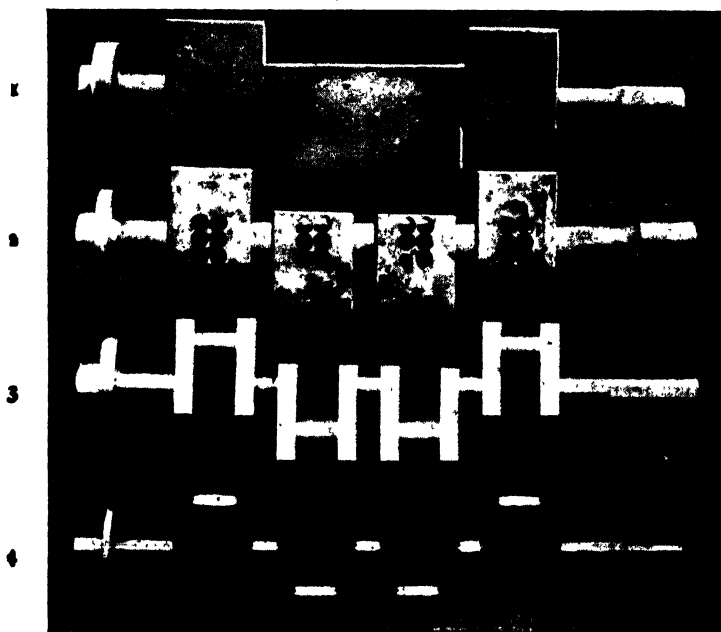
Four stages in the manufacture of a petrol motor crank shaft.
